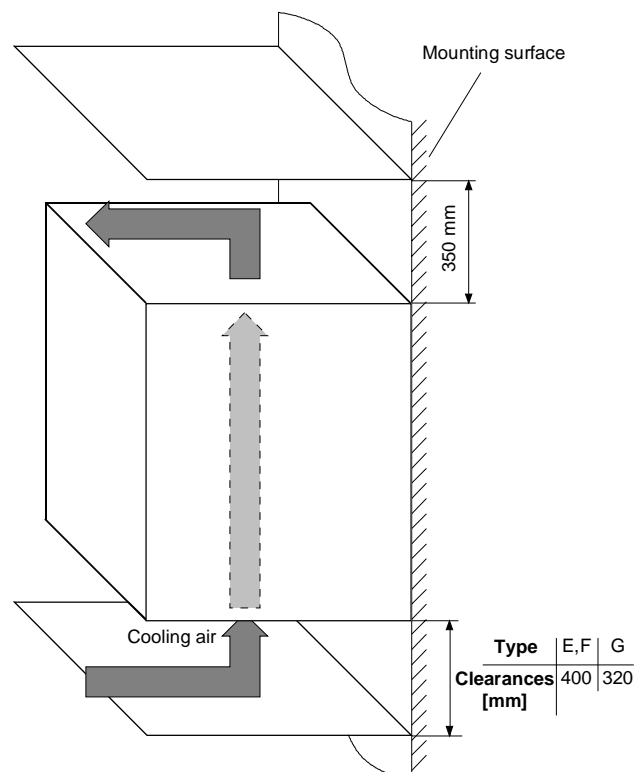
Minimum clearances for cooling air requirement (types E, F, G)
